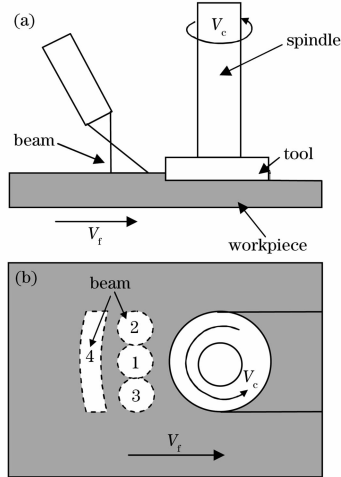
Illustration of integration of beam with cutting tool for surface milling. (a) side view; (b) top view
